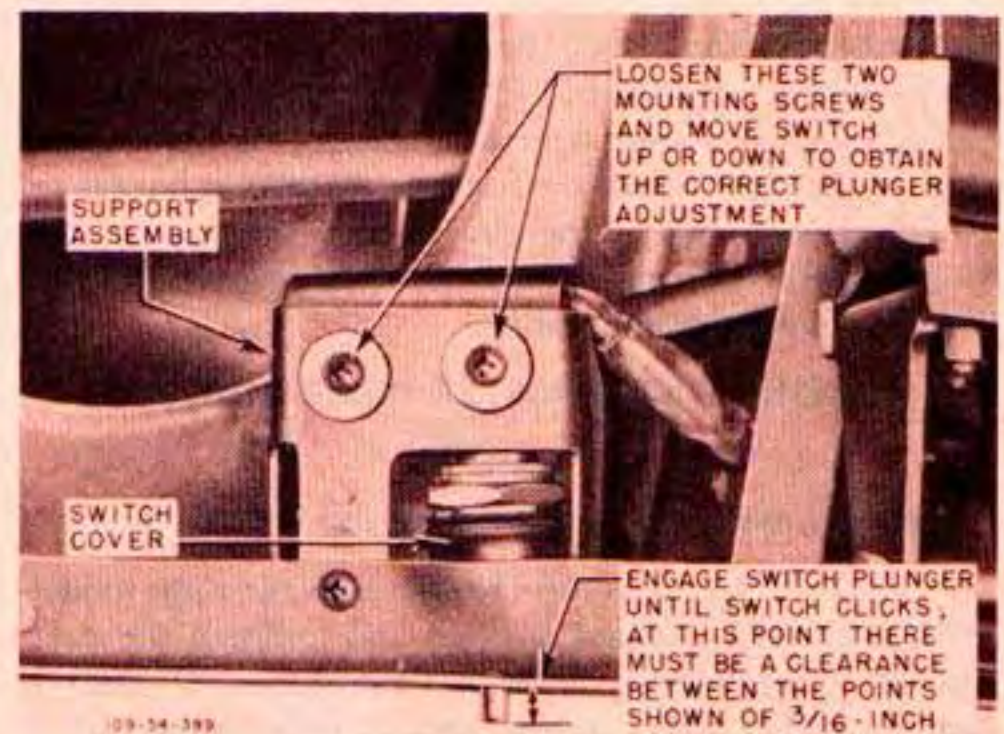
Adjusting Main Gear Fairing Door Switches—Late Airplanes
